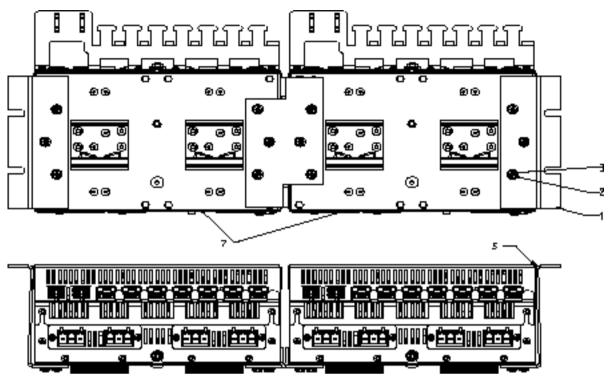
Rack mounting of two IE-Switches X-300EEC fastened together Figure at top: Rear of the switches Figure at bottom: View from below
